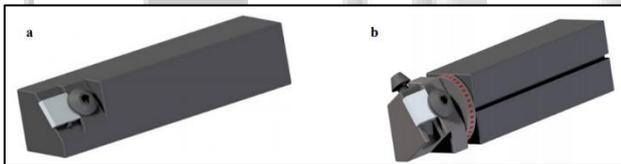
MCAD 3D Models of Tools for Oblique Cutting with Straight Cutting edge: a) the Tool with a Permanent Geometry of edge, b) a Tools with Moveable cutting Edge with an Option to Change $\lambda R_s R$ angle
